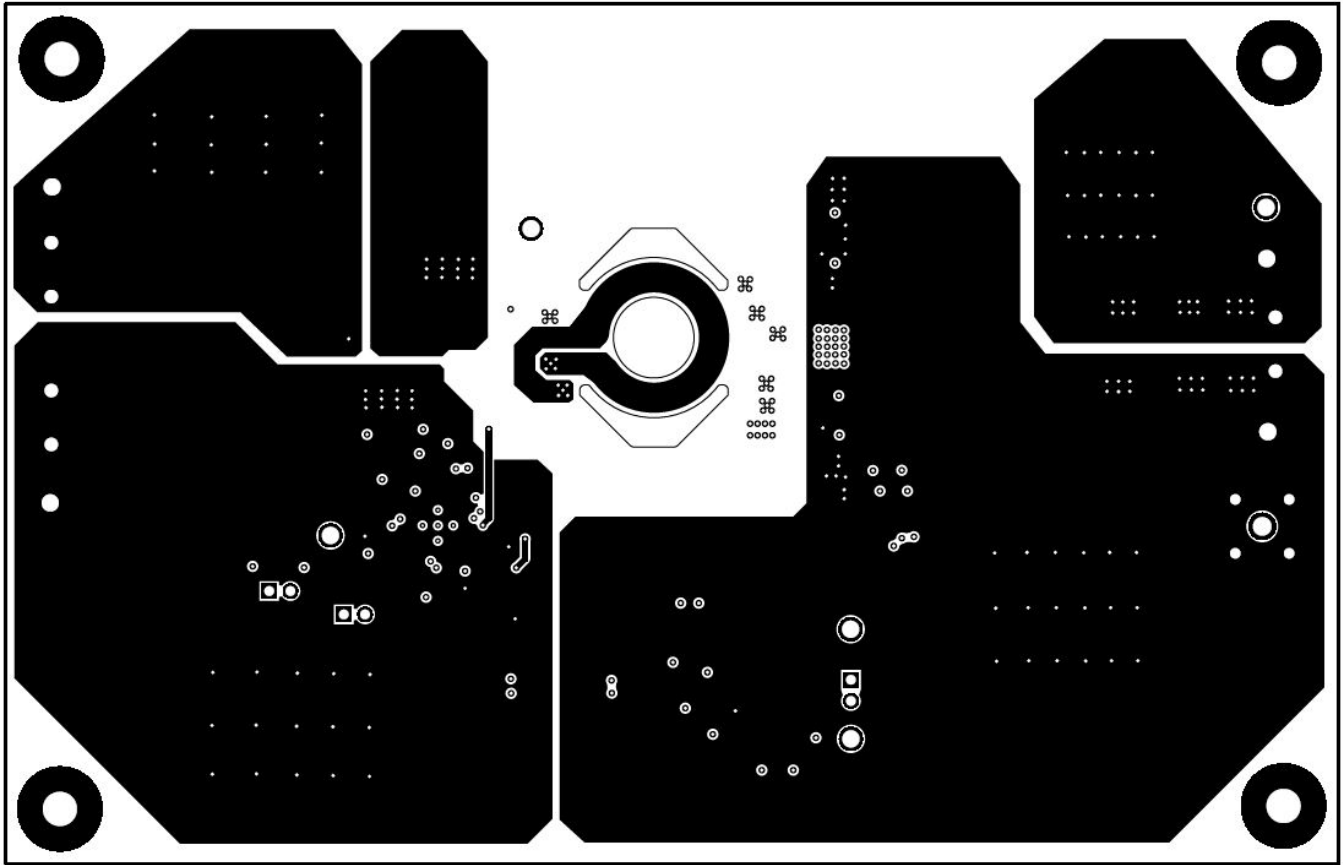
LM5036 EVM: Layer 4 PCB Assembly layout
